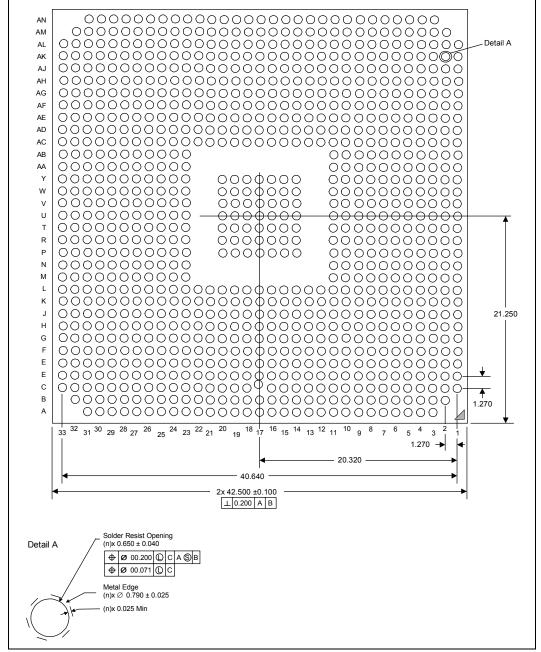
Intel® 82875P MCH Package Dimensions (Bottom View)
